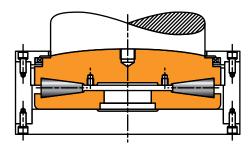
Typical screwdown support configuration using a TTHDSX thrust bearing.
